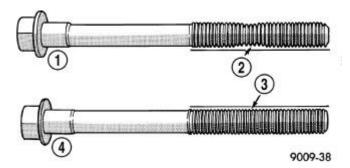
Checking Cylinder Head Bolts For Stretching (Necking)
